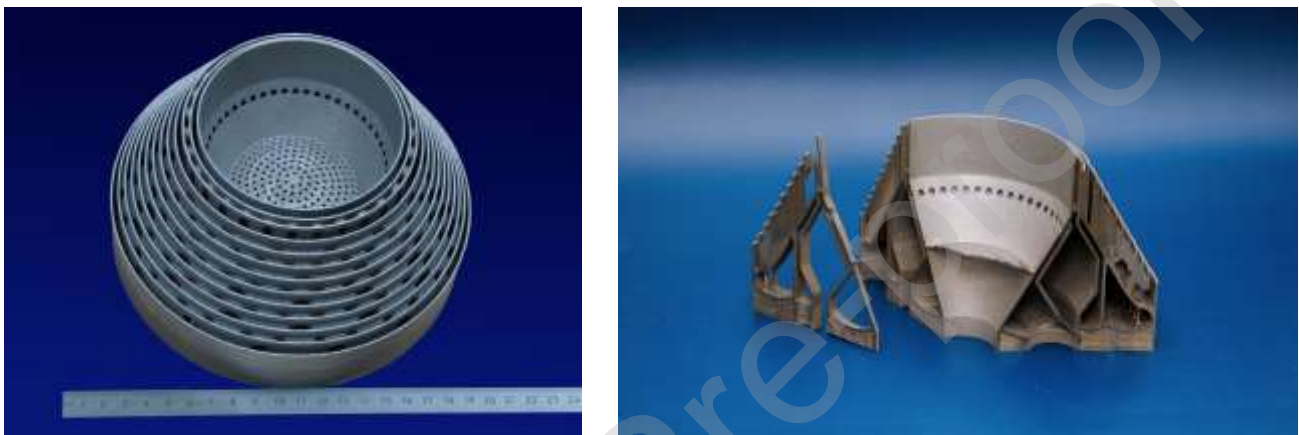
(a) Cone-like CAB prototype after LPBF manufacturing; (b) two cut parts of the CAB prototype showing the complex internal design.
